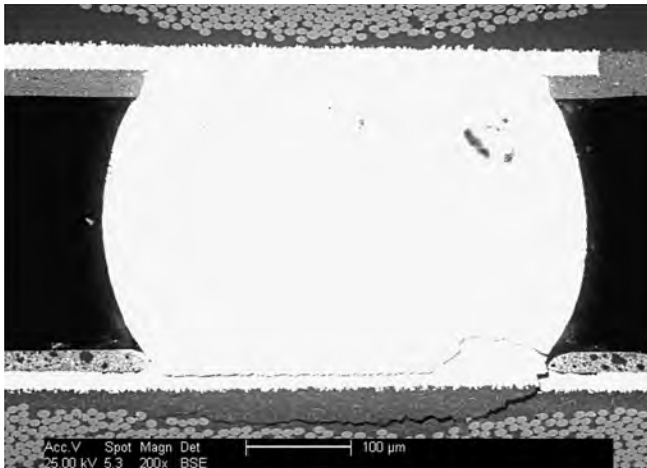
BGA failure mode: IMC/solder failure.
